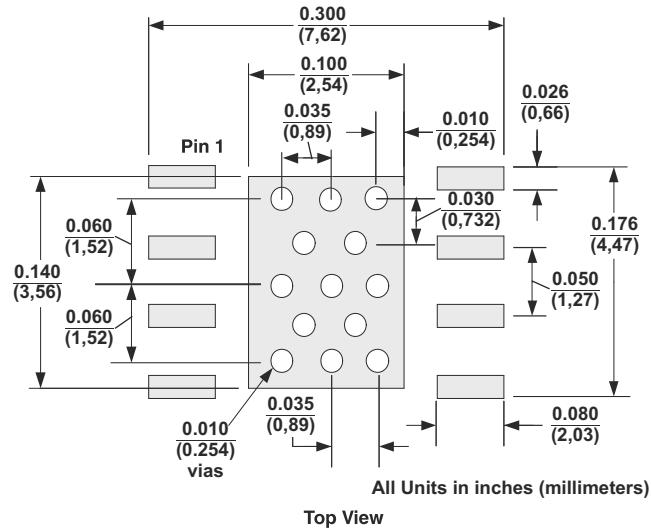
DDA PowerPAD PCB Etch and Via Pattern
